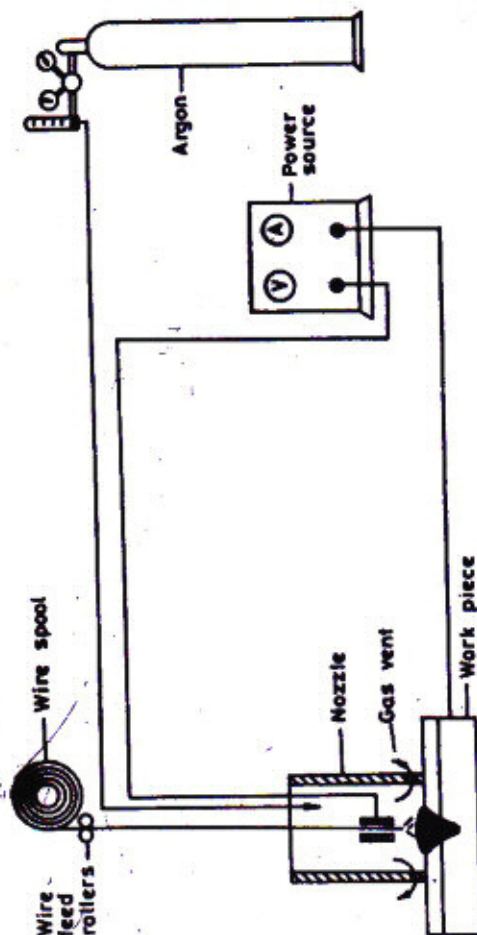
Schematic illustration of a set-up for GMAW spot welding.
